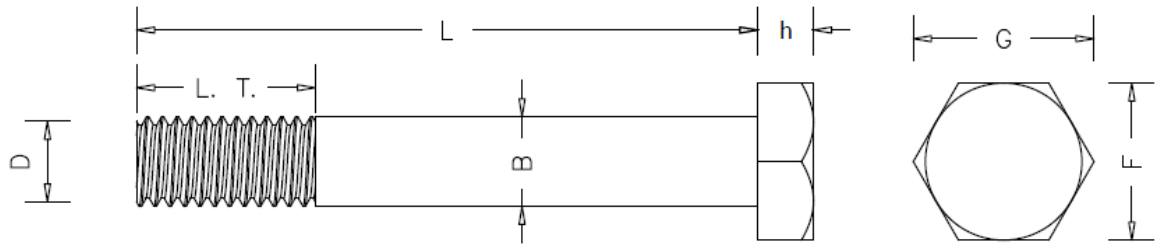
ASTM A325 Bolt Dimensions [1]
